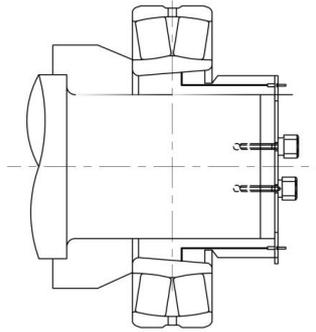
Mounting with Special Sleeve and Hydraulic Pressure
